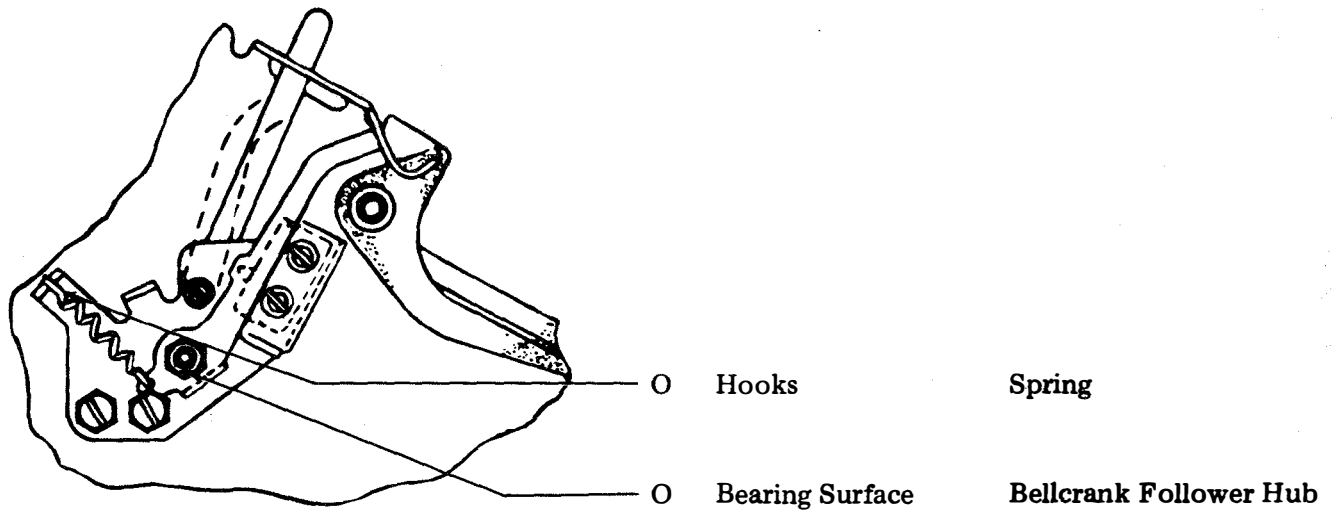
Paper-Out Alarm Mechanism, Left Side View
